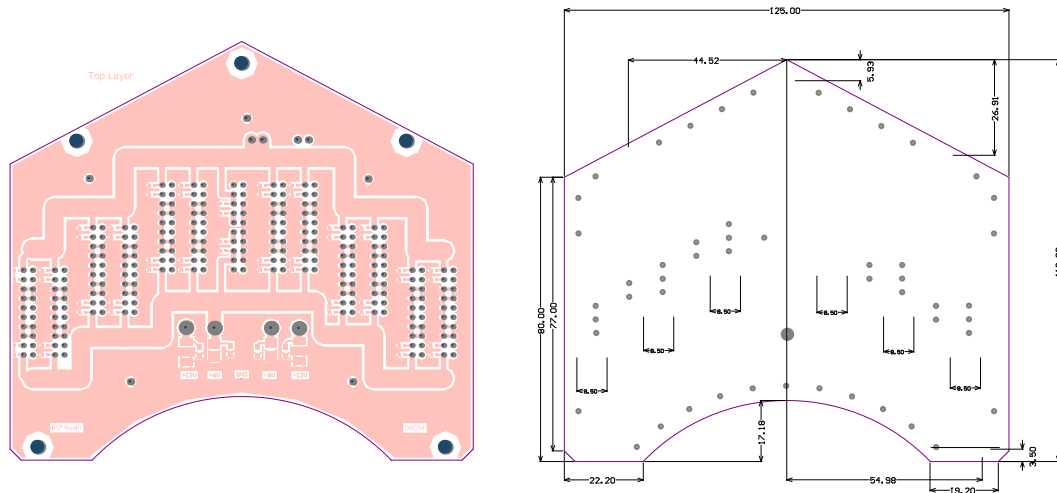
Modified carrier PCB for preamplifiers. Top layer of the PCB (left) and dimensions (right).
